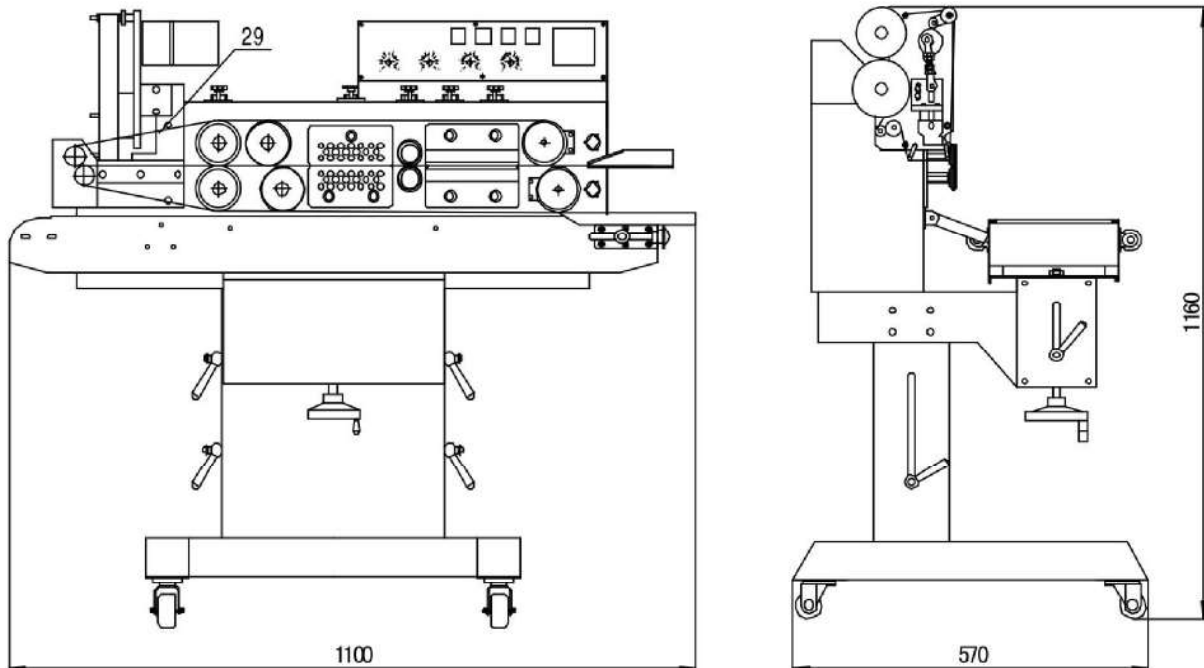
FRS-1120W Band Sealer (29) Hot Stamp Imprinter
